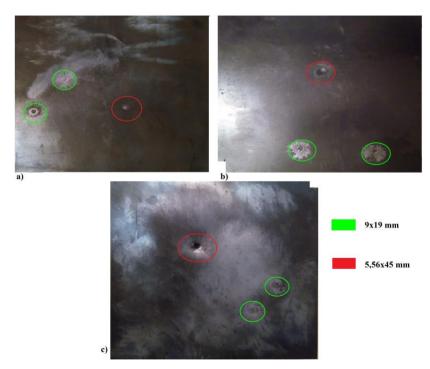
Improved plates after being shot: a) 8 mm, b) 6 mm, c) 4 mm
